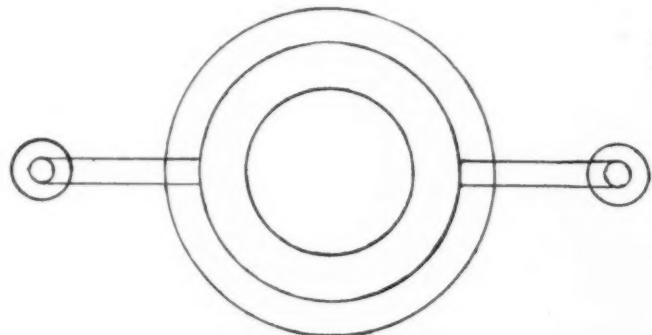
FIG. 2.—A PLAN VIEW OF CASTING SHOWN IN FIG. 1.
